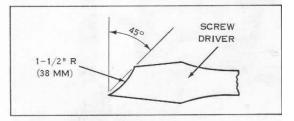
Piston Pin Retaining Ring Removing Tool
